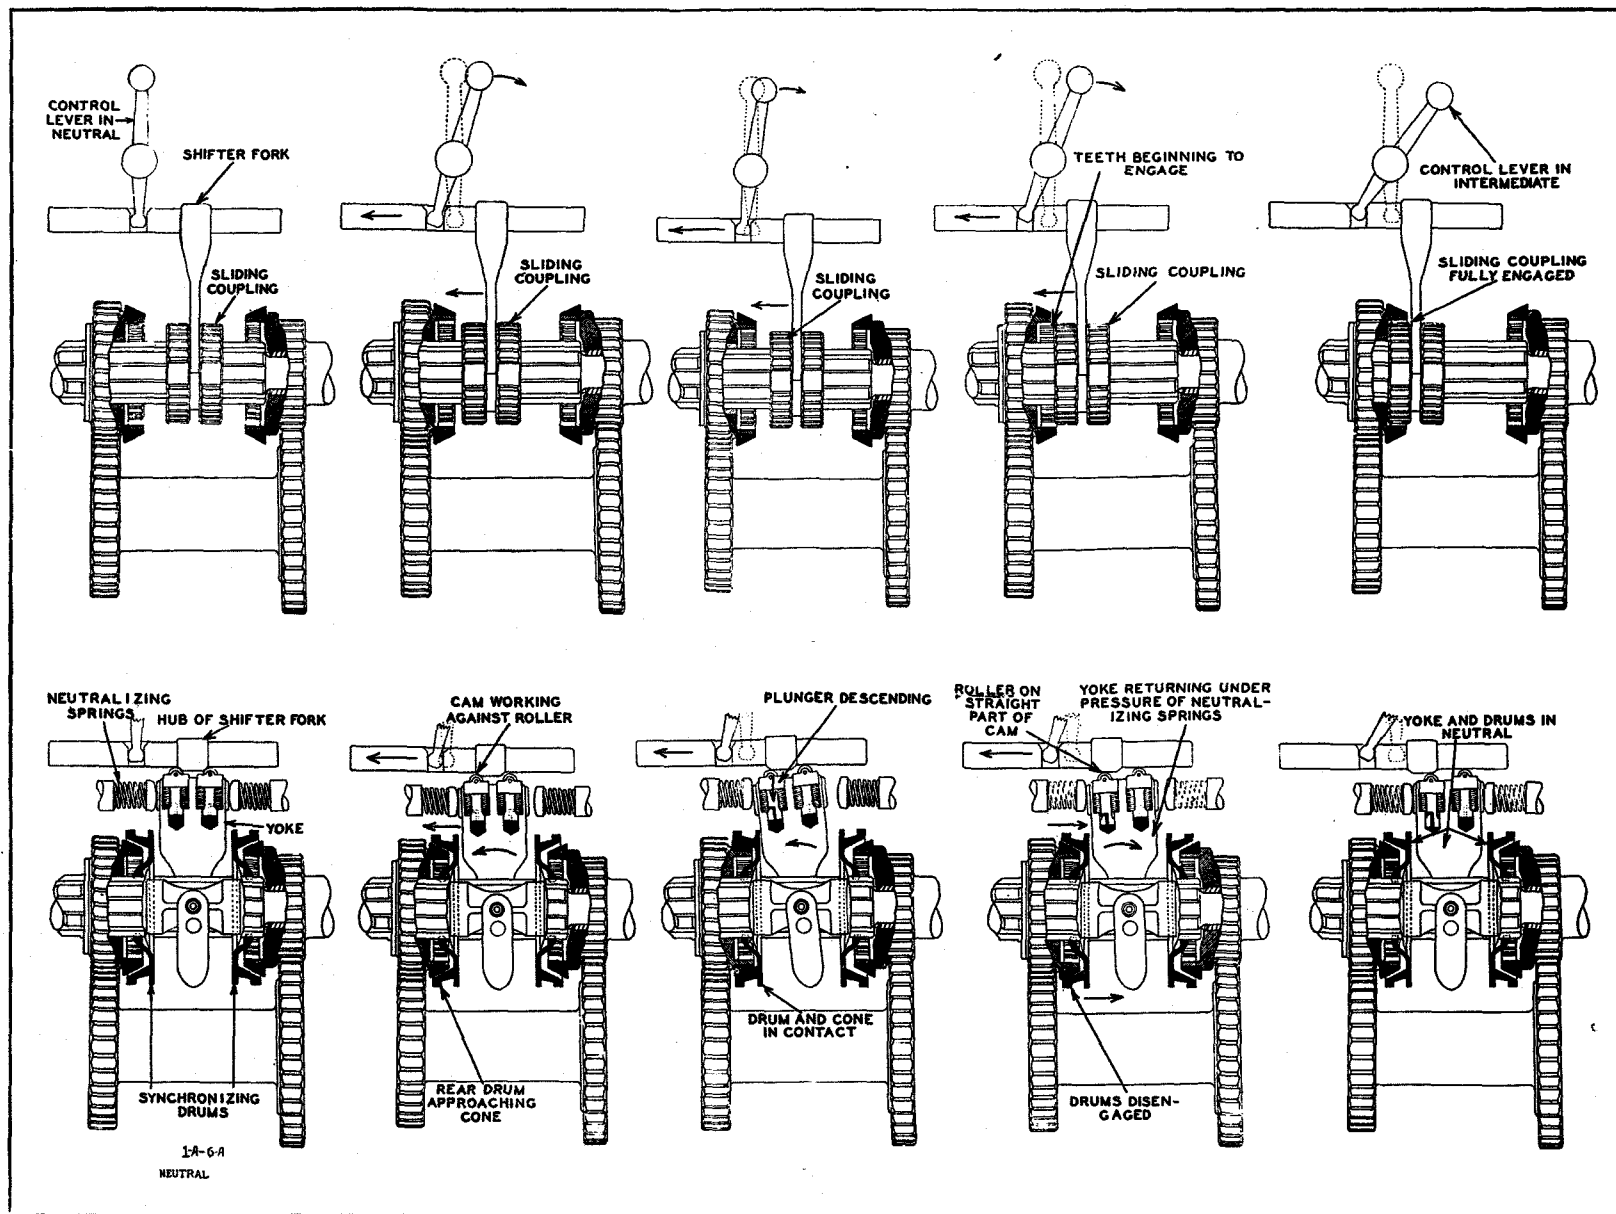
Diagrams of operations in shifting from neutral to intermediate. The gears and synchronizing mechanism are shown separately for clearness. Actually, they are assembled together.
